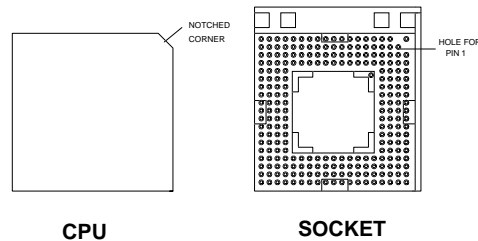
Pin 1 Indicator on the CPU and Socket
